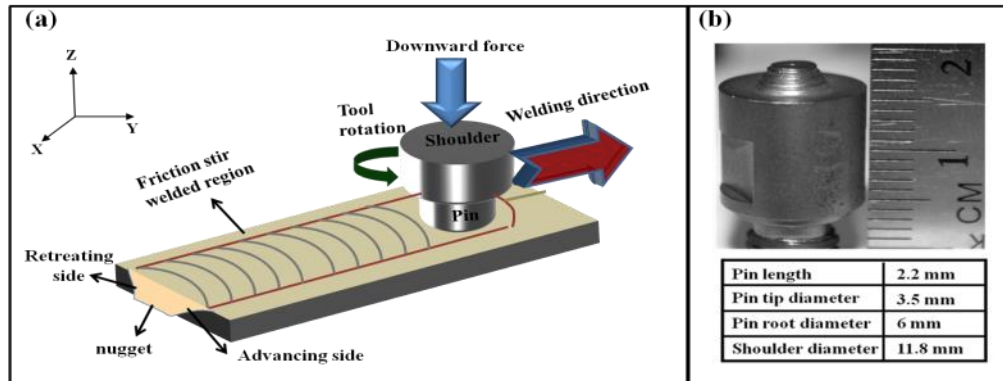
(a) Schematic illustration of friction stir welding. (b) Tool used in the current study.
